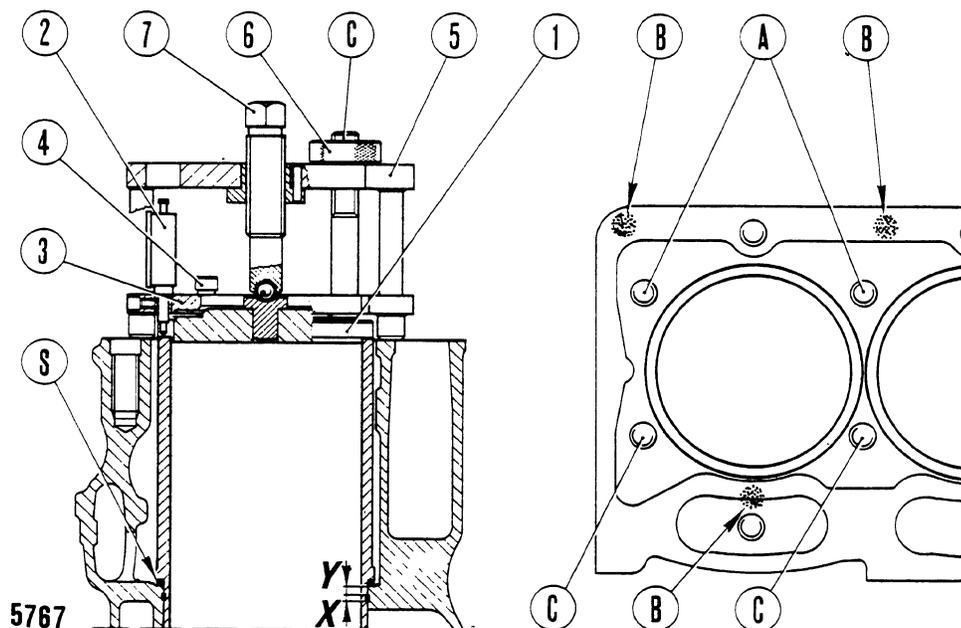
Checking cylinder sleeve proudness relative to crankcase top.
